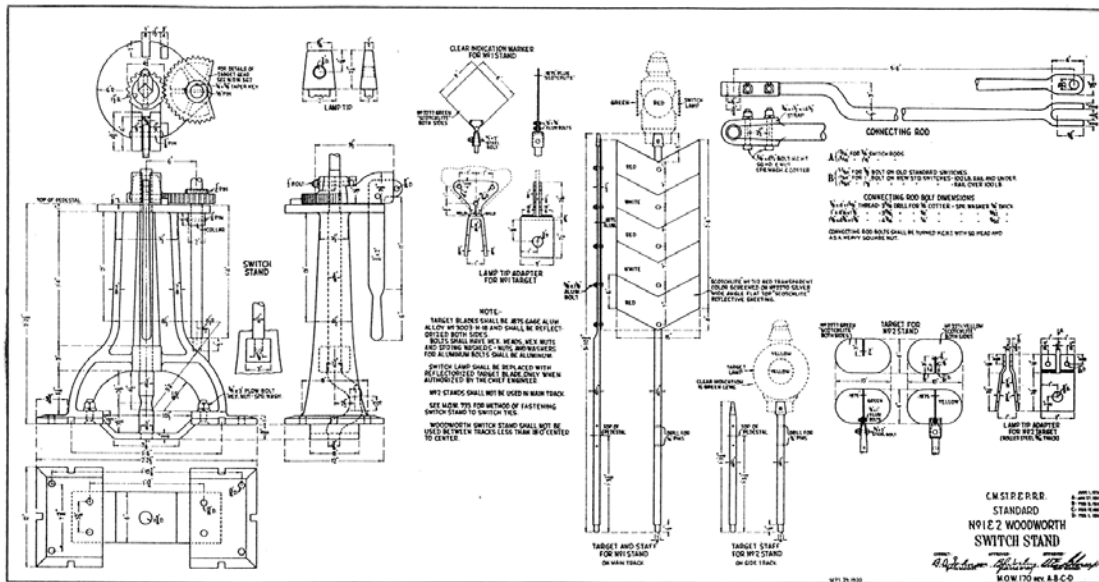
Standard Milwaukee Road track switch stand (author’s collection).
